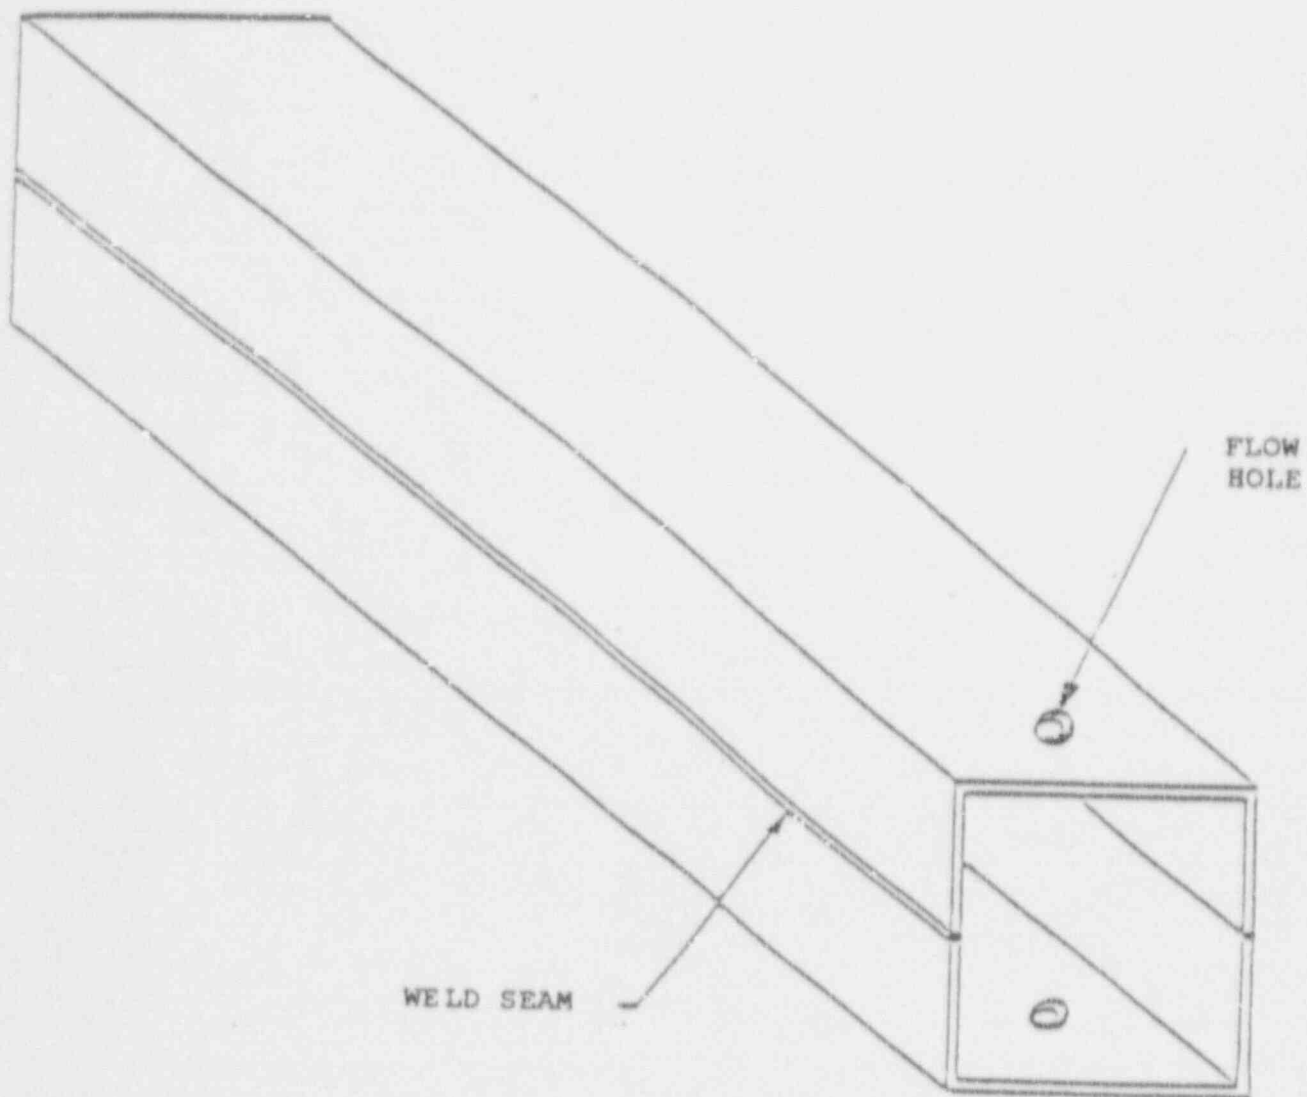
SEAM WELDING PRECISION FORMED CHANNELS
